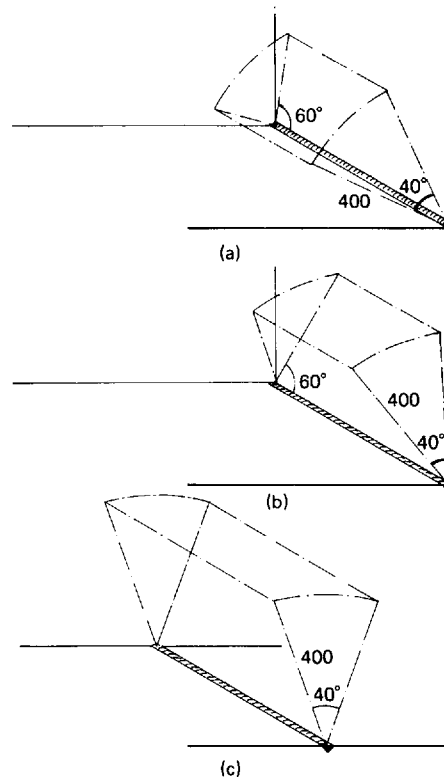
Access requirements for manual welding. (a) Fillet weld; (b) corner butt weld; (c) planar butt weld
